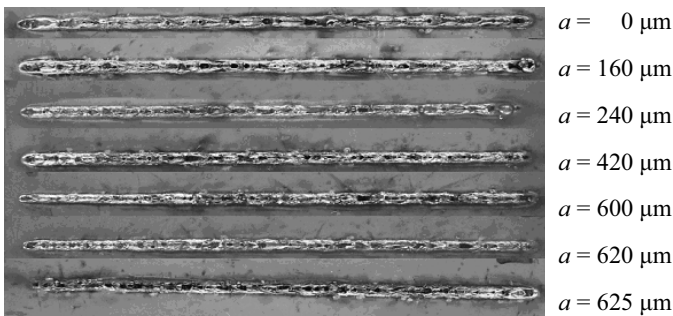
Surface photograph of zinc-coated steel welded with oscillation Nd:YAG laser welding; $P_{Nd:YAG} = 3 \text{ kW}$; $v_w = 2 \text{ m min}^{-1}$; frequency of oscillation 1500 Hz; a is the amplitude of oscillation; specifics of zinc coating not given in the reference [from MEIER 2005]
